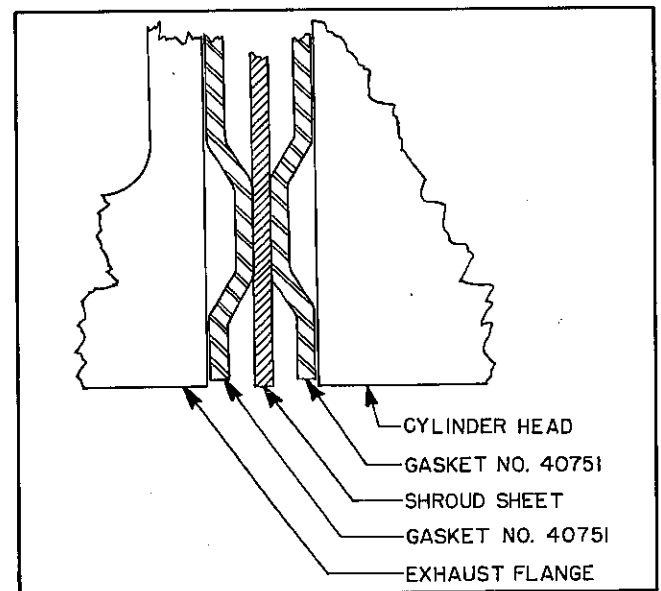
Installation of Manifold Gaskets on Engines Equipped with Turbo Supercharger
